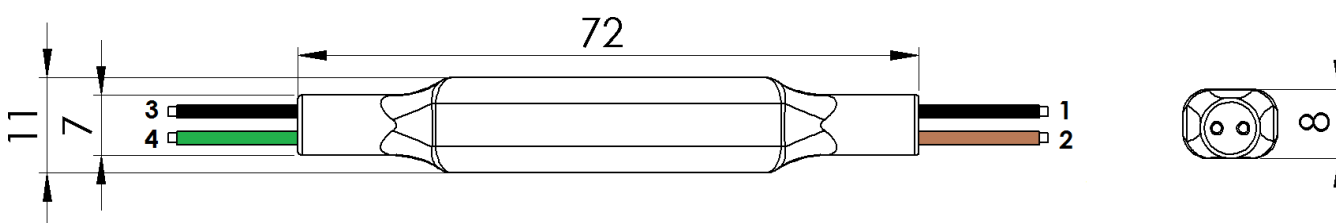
EMUS G1 Bottom Isolator (CCA020D) mechanical drawing. All dimensions in millimeters.
